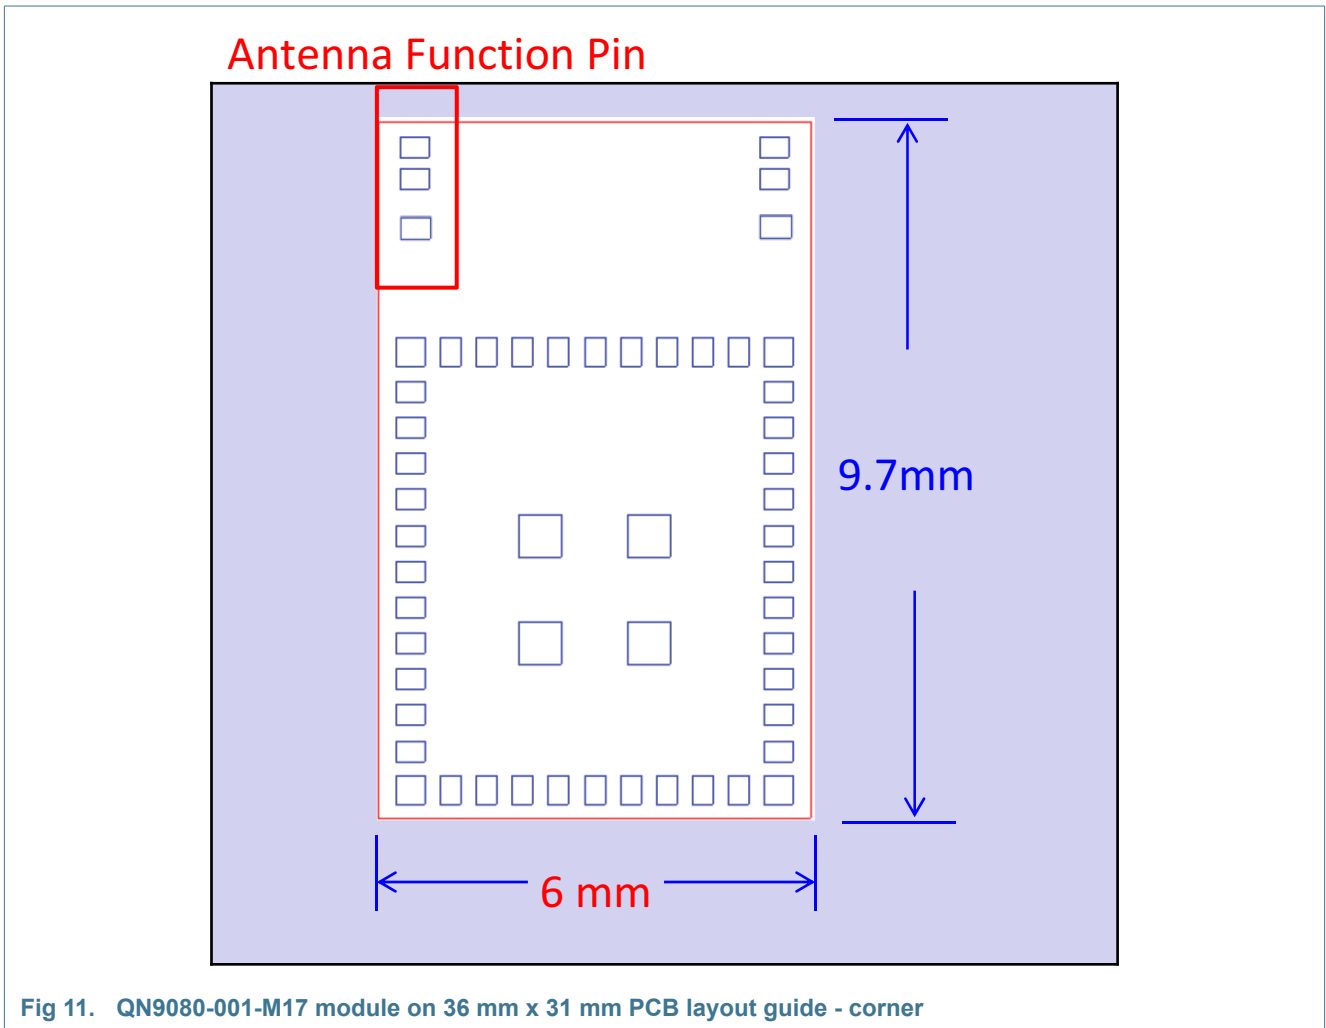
QN9080-001-M17 module on 36 mm x 31 mm PCB layout guide - corner
